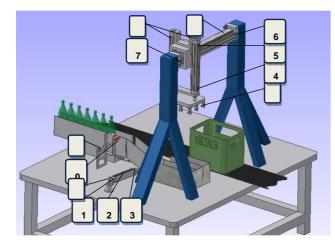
Pneumatic machine for stacking bottles – 3D model
